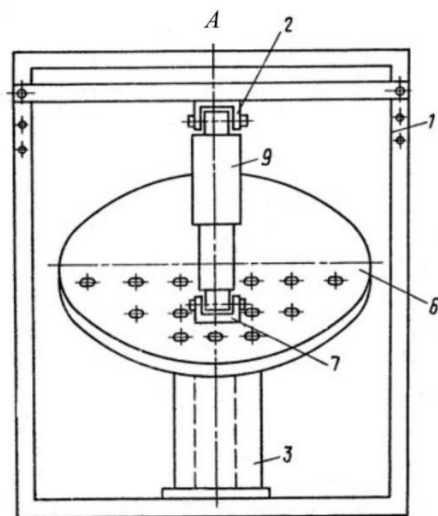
Test bench for hydraulic vibration dampers (View A)
